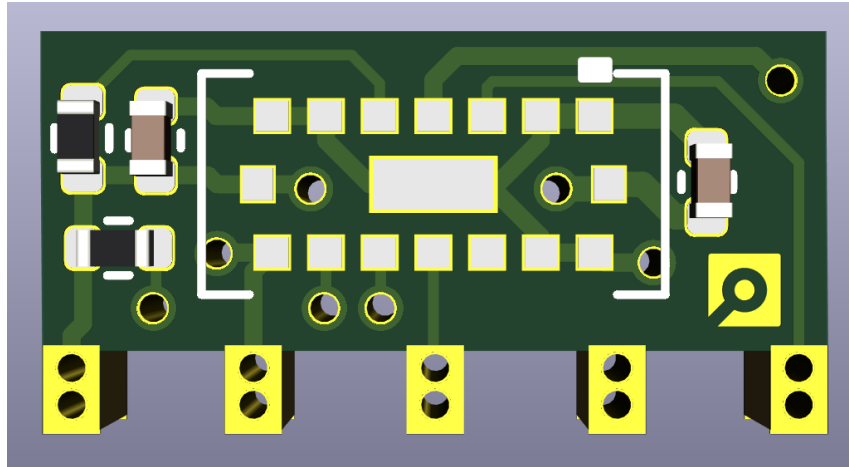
Satellite PCB board front view, in the 3D viewer of Pc-New.
